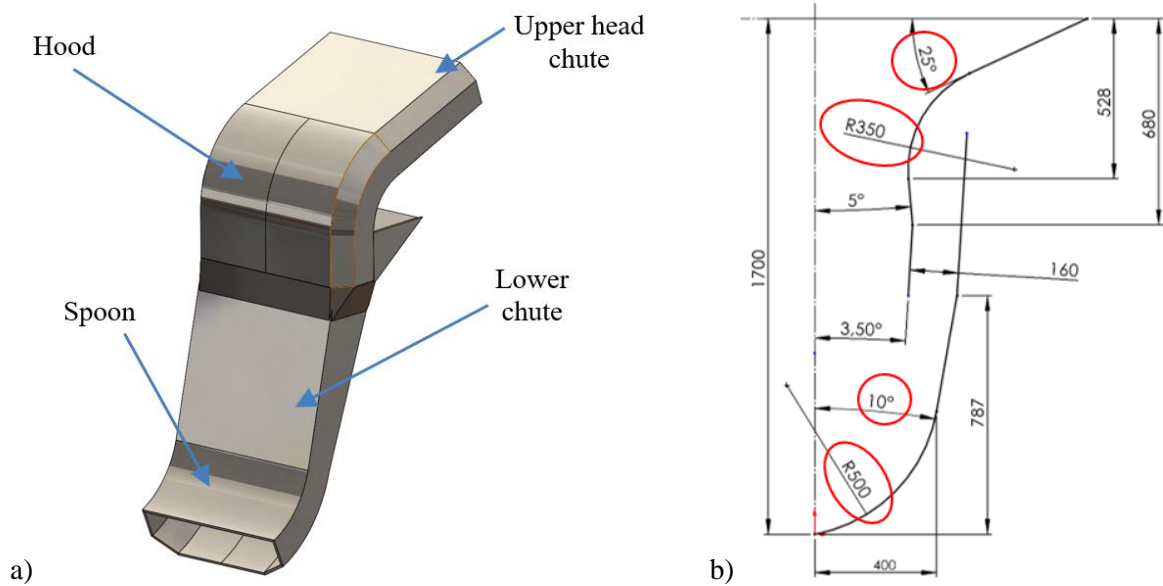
a) 3D model of the upper head chute and lower chute; b) Dimensions of the conveyor belt transfer chute given in millimetres [25].
